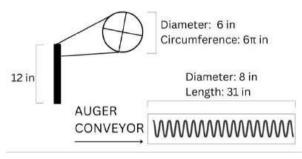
Measurements of Auger Conveyor and Feed Rod
